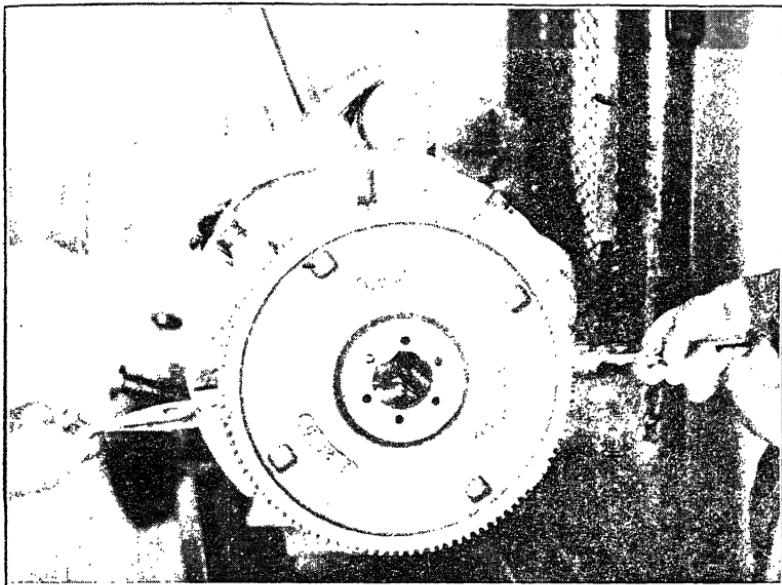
Applying the New Ring Gear to the Machined Flywheel
